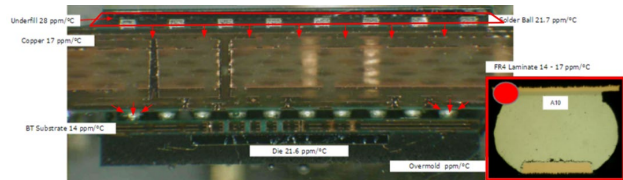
BGA Solder Ball Fatigue Failure due to Underfill on mirrored WLCSF
